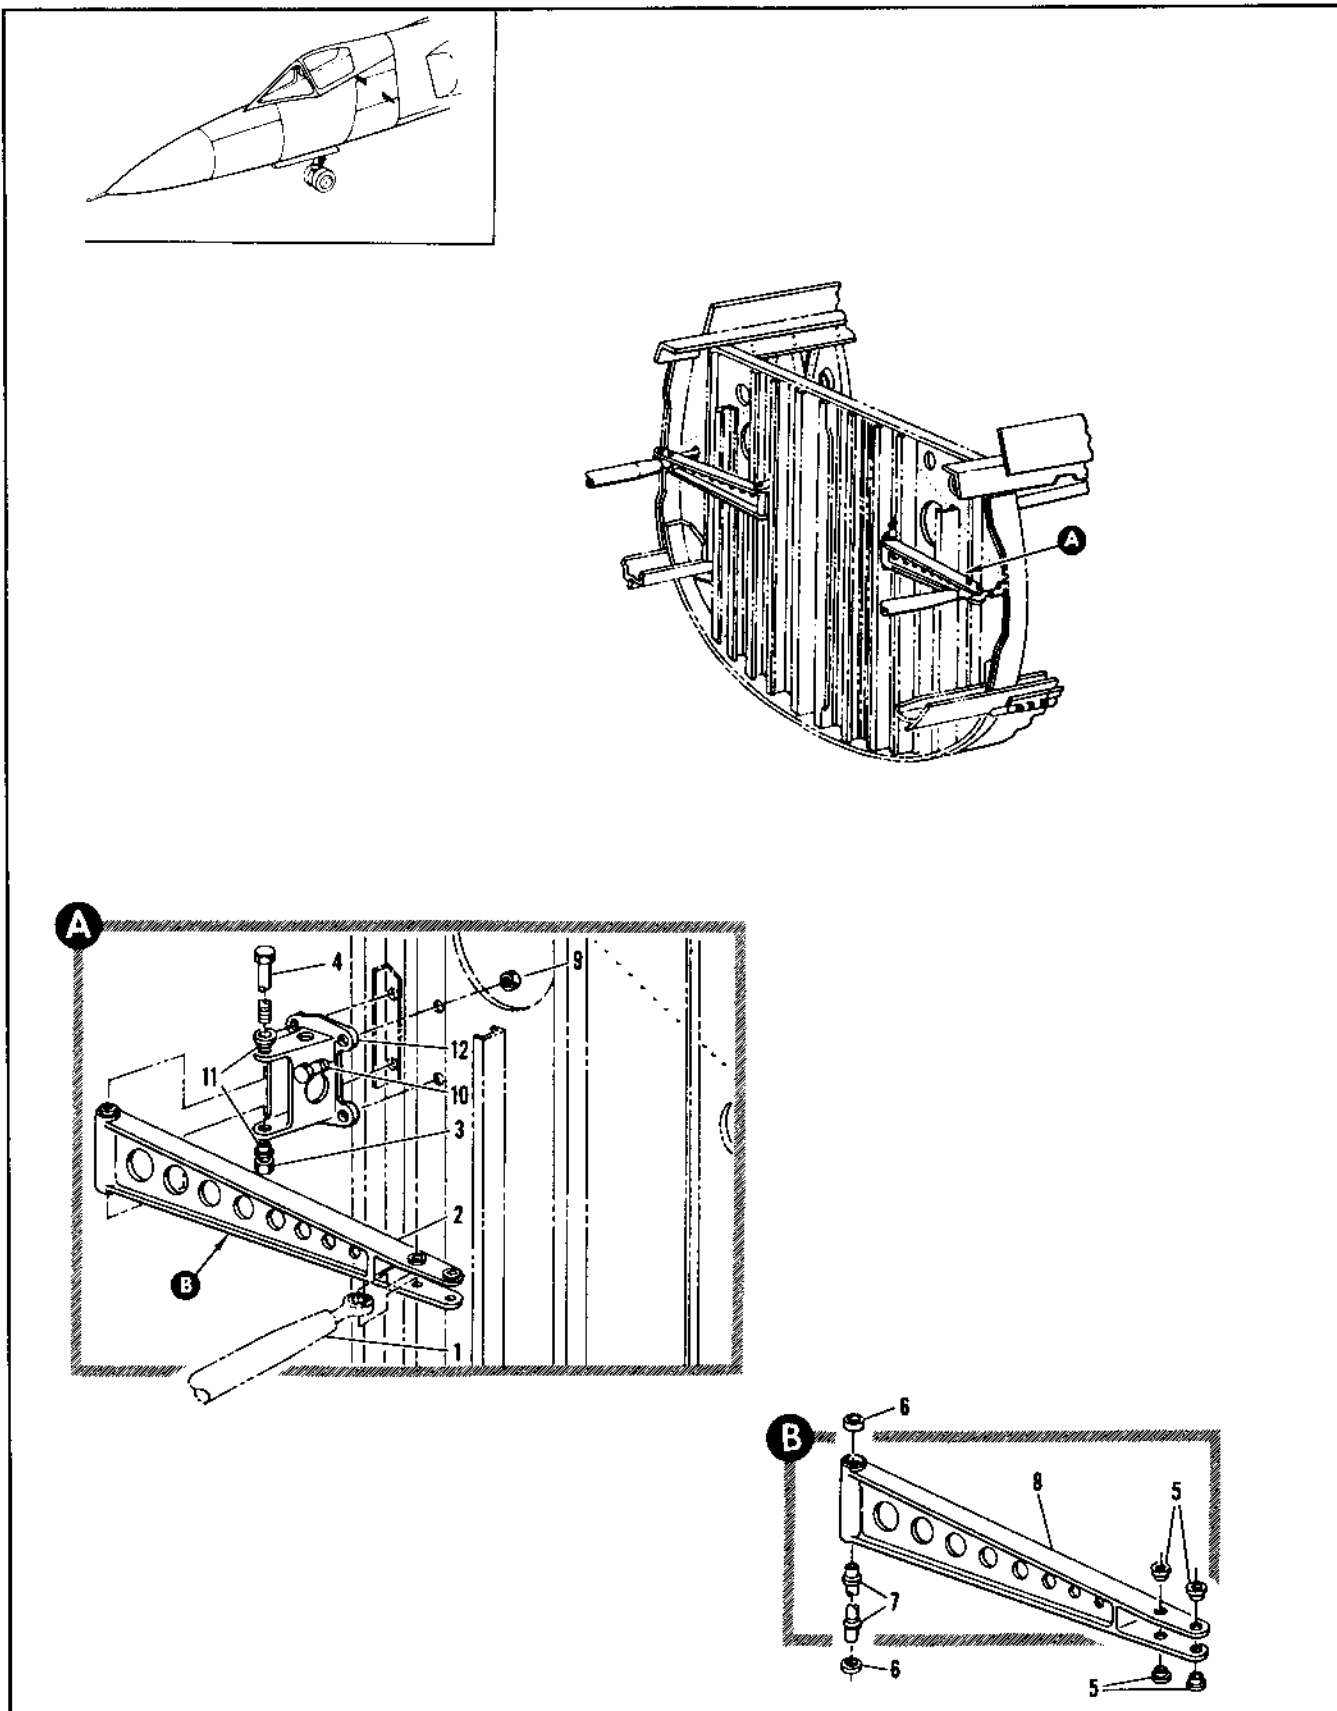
Elevator and Aileron Control Idler Installation Sta 216
